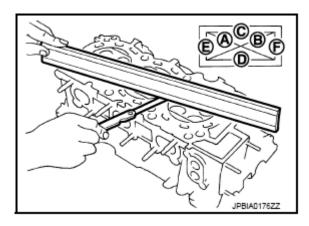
Measuring Cylinder Head Distortion Using Tool Courtesy of NISSAN NORTH AMERICA, INC.
